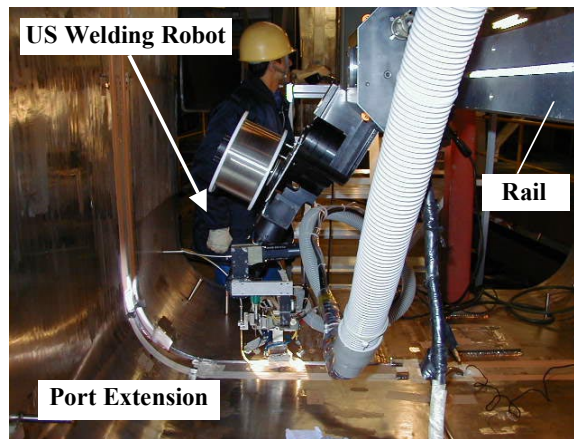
Inner Shell Welding for Integration of Port Extension
